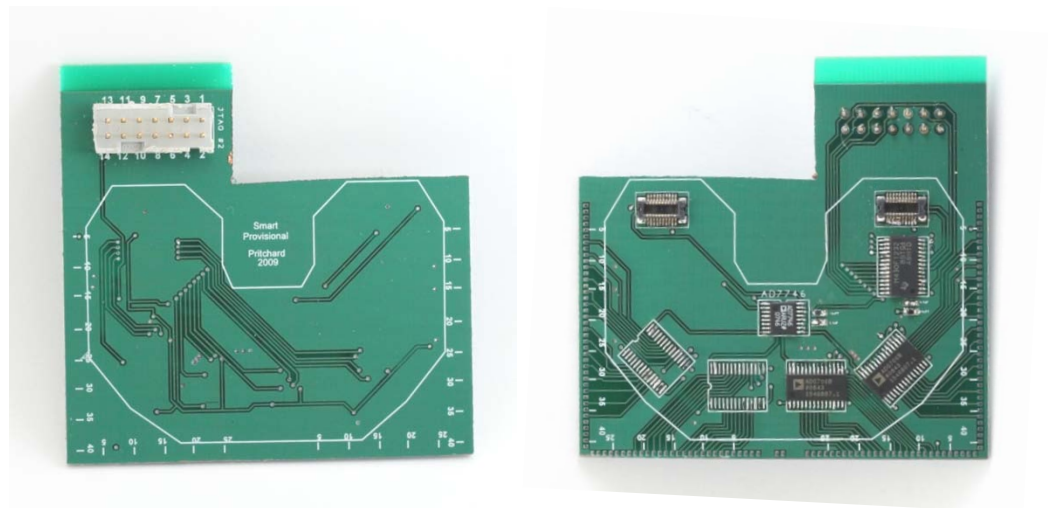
Iteration 4, top sensor board. Configured for unicondylar testing, but expandable to full condylar array. Left: top side ready for sensor mounting. Right: bottom side with MUX, CDC chip, and board-to-board connectors.
